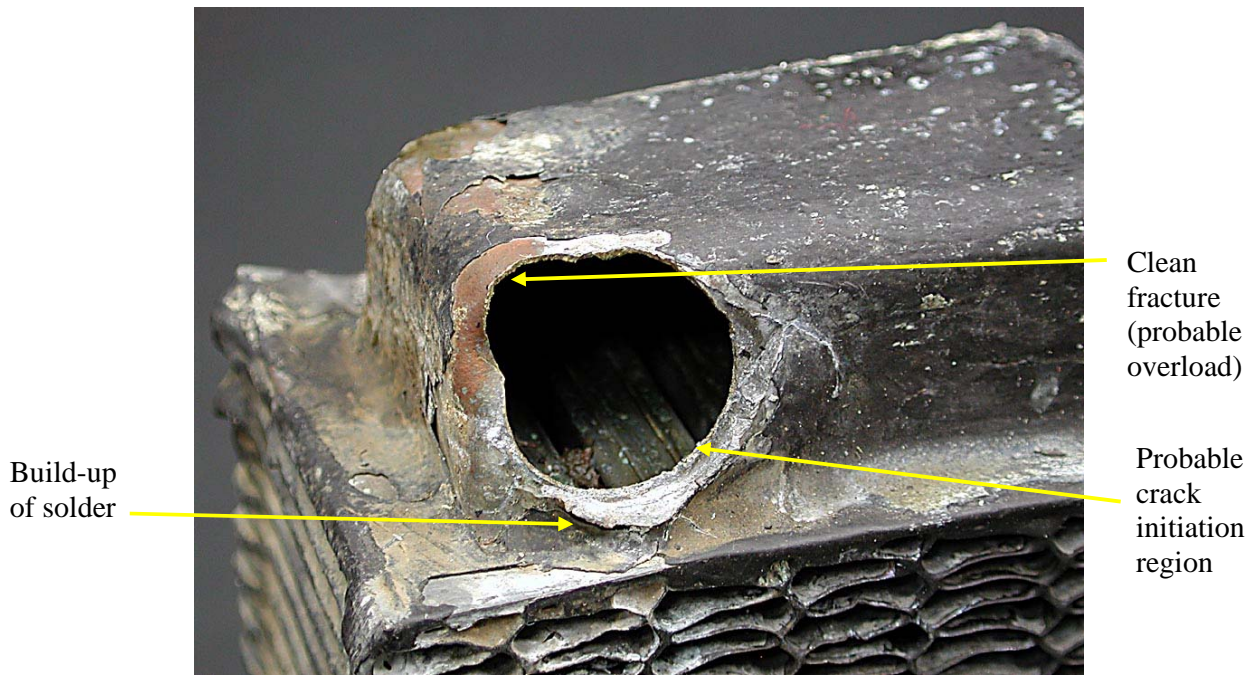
Detailed view of fracture surface on radiator (photo courtesy of QinetiQ)
